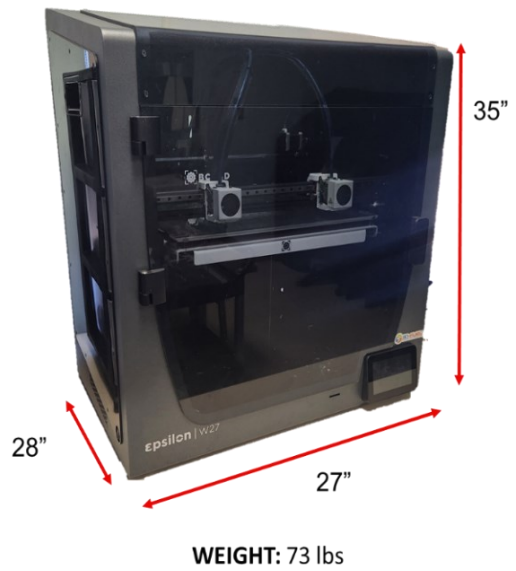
Images of 3D printers used throughout this study with dimensions.
